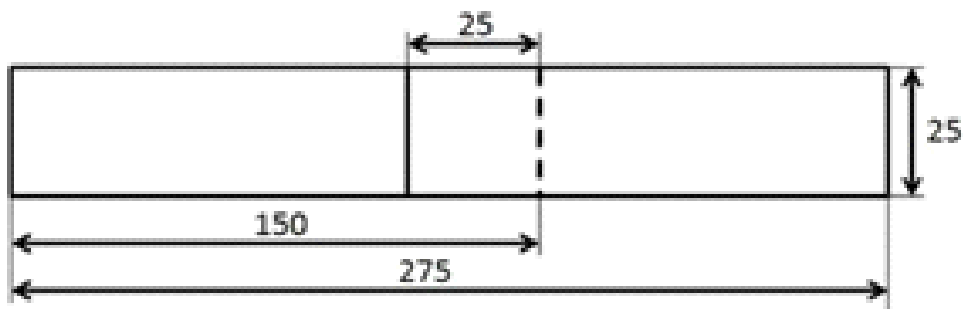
Configuration and dimensions of specimen(all dimension in mm) [9]
